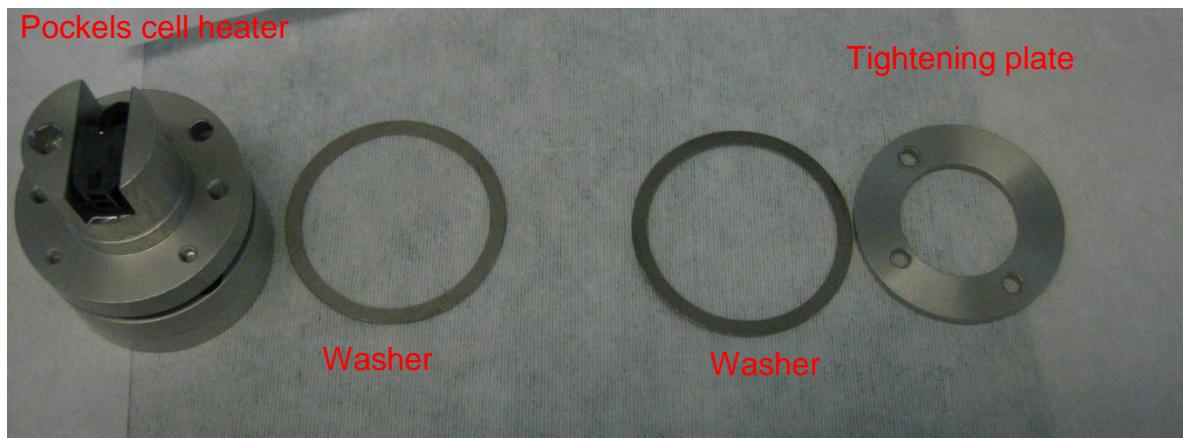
Pockels cell holder (heater) with washers and tightening plate
